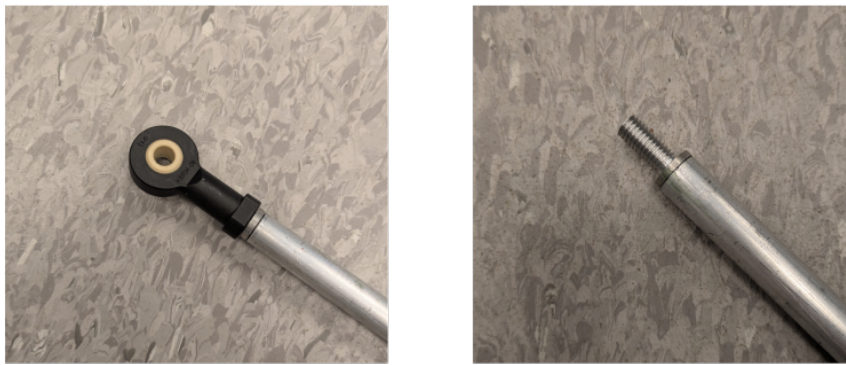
igus KBRM-06 spherical rod end (left). Right-hand threaded aluminum insert bonded into the hollow pushrod tube end with Loctite 638 (right).
